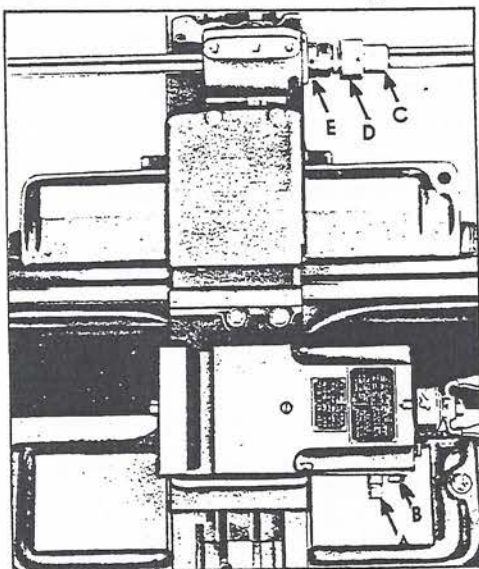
Close-up view of Universal Relieving Attachment, Compound Rest Mechanism
